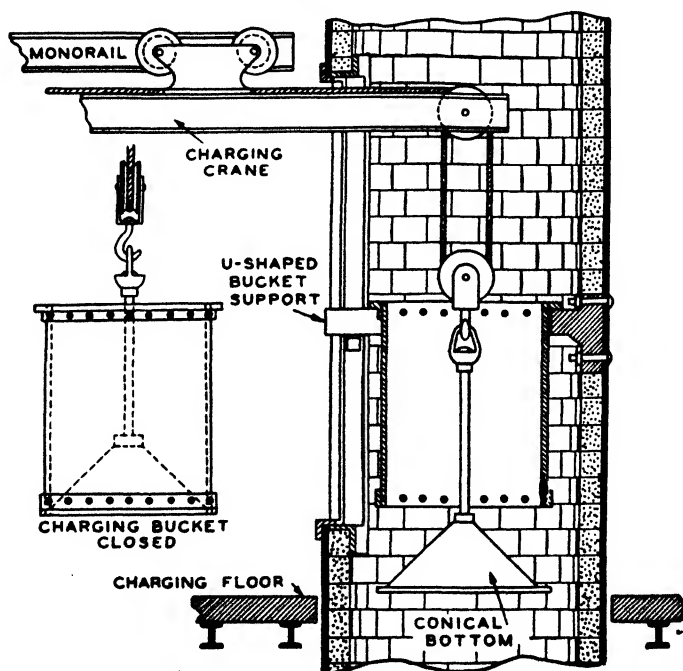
CHARGING BUCKET (WHITING DESIGN)
